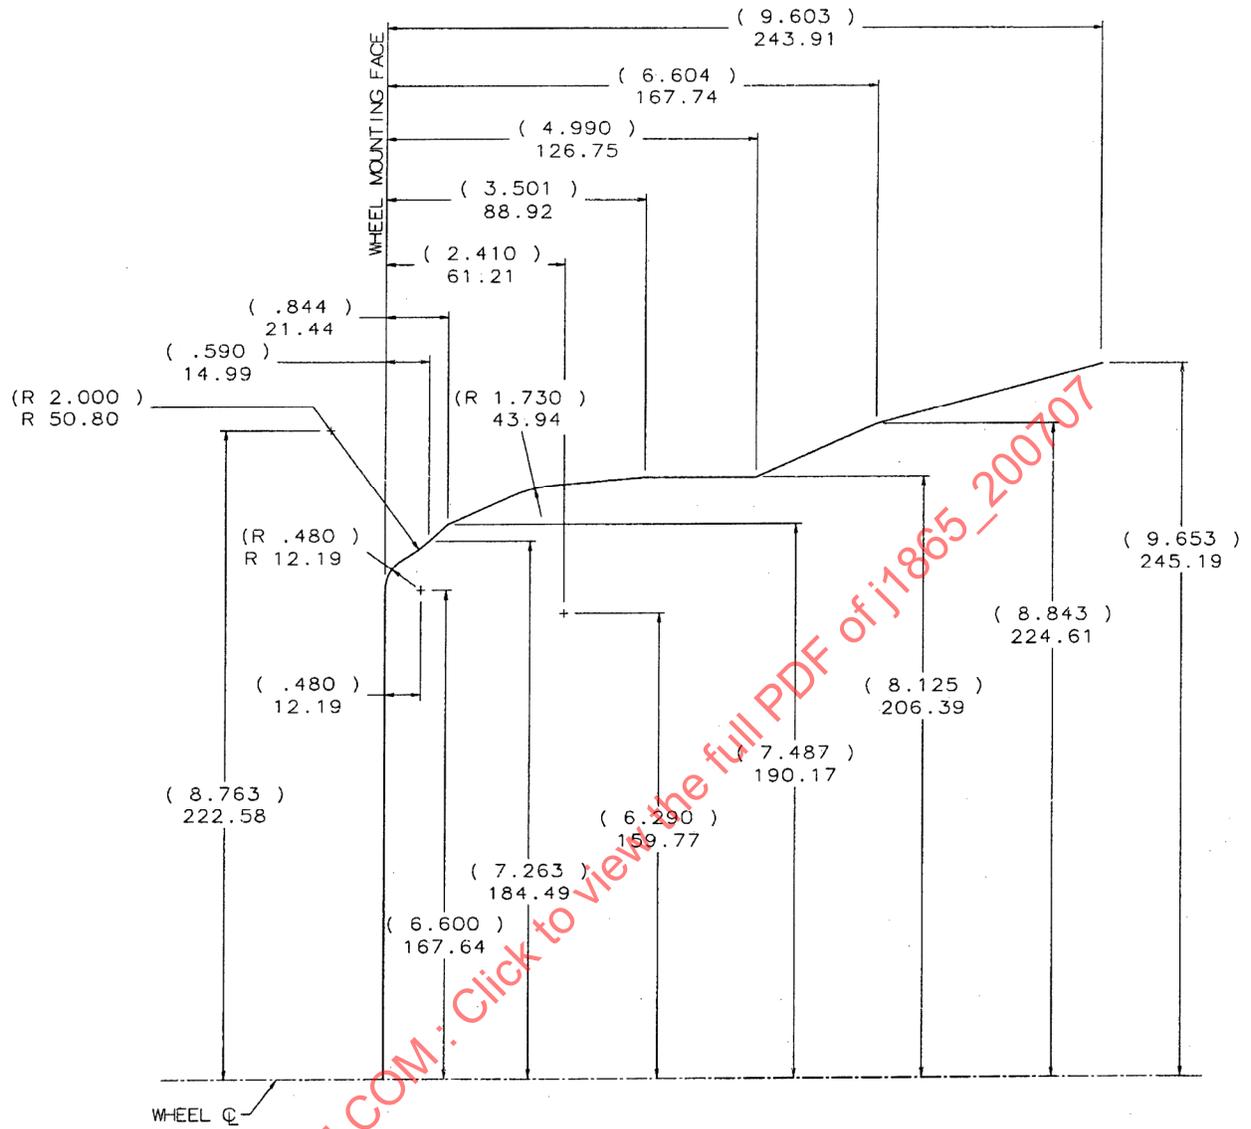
CLEARANCE LINE 19.5 X 6.75 WHEELS, MOUNTING SYSTEM II
